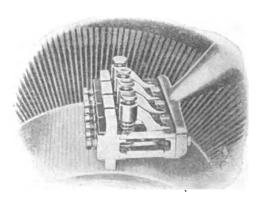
Parallel-Movement Brush-Holder. Crocker-Wheeler Company.
